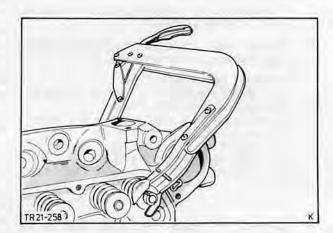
Remove collets with standard valve spring compressor, – 'A' engine
